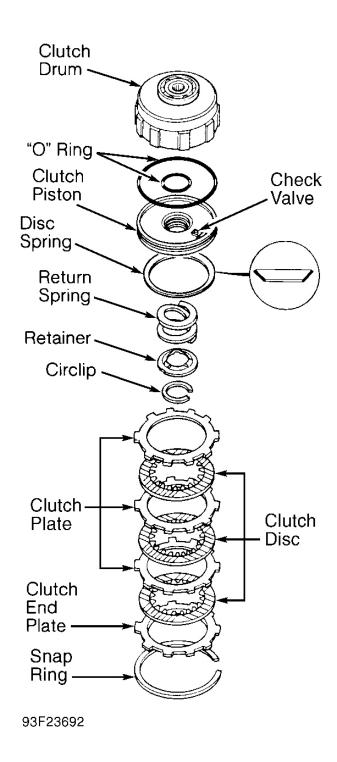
Exploded View Of 1st-Hold Clutch Assembly Courtesy of AMERICAN HONDA MOTOR CO., INC.
